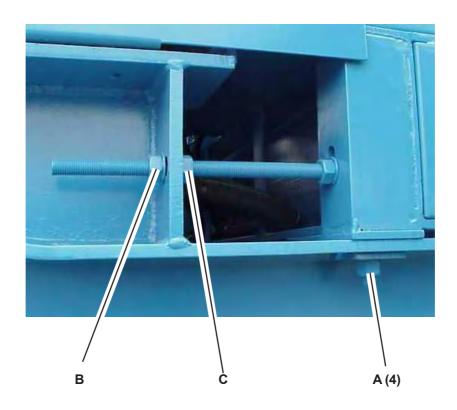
a Crusher Drive Belt Tensioning Mechanism LH Side
